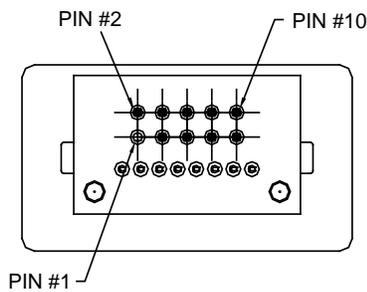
SR4210 Panel-Mount Receptacle Dimensions
